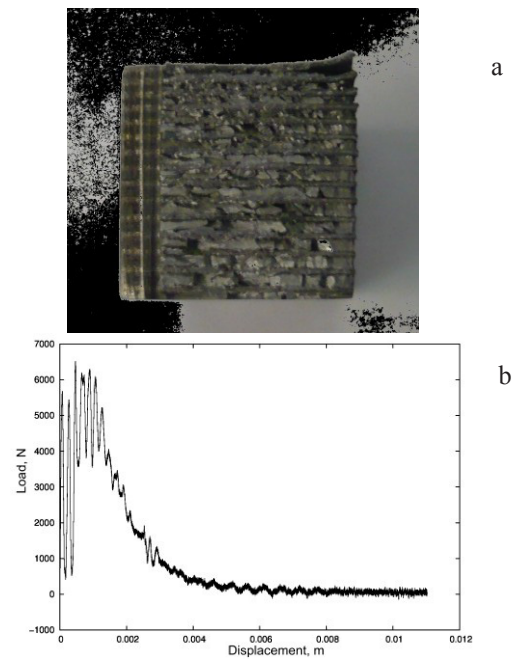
Fracture surface (a) and impact loading diagram (b) for crack divided oriented sample
